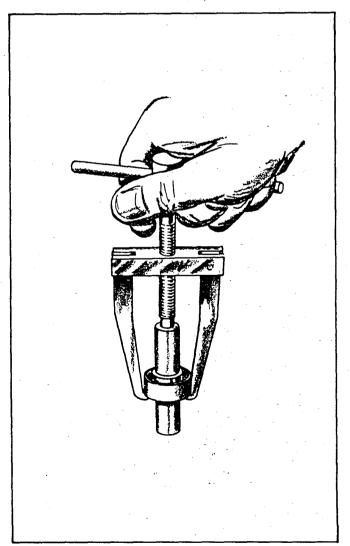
MOUNTING OVERRUNNING CLUTCH
